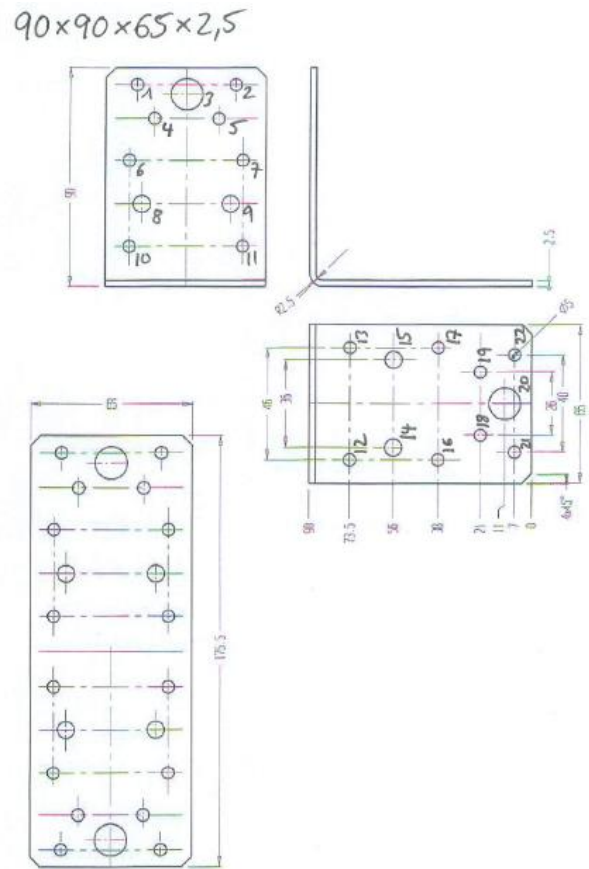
Dimensions of angle bracket 90x90x65x2,5
